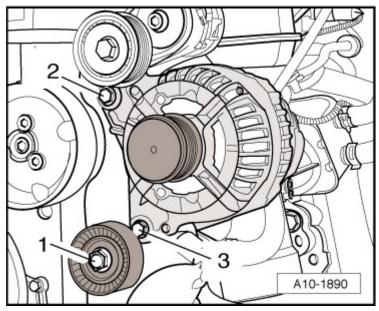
Identifying Upper Idler Roller And Bolts Courtesy of AUDI OF AMERICA, LLC
